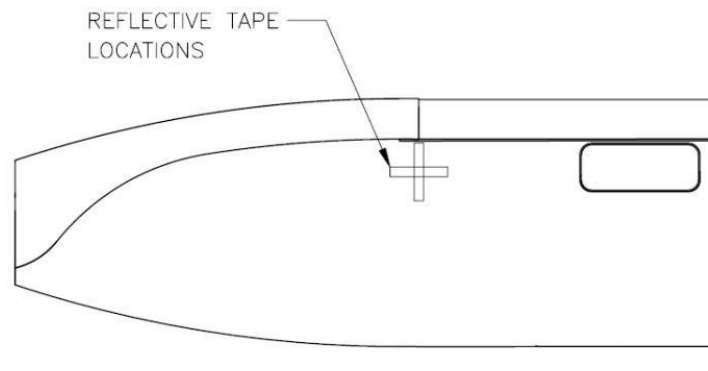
Reflective tape locations for Strobex, 1 piece each side, lower surface
